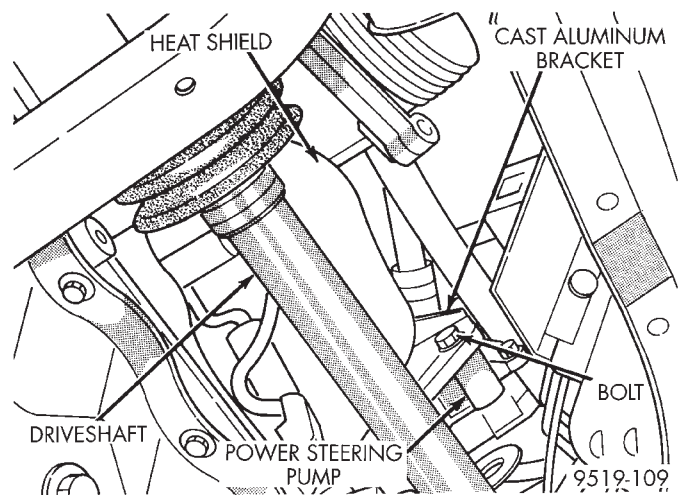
Power Steering Pump Attachment To Rear Mounting Bracket
